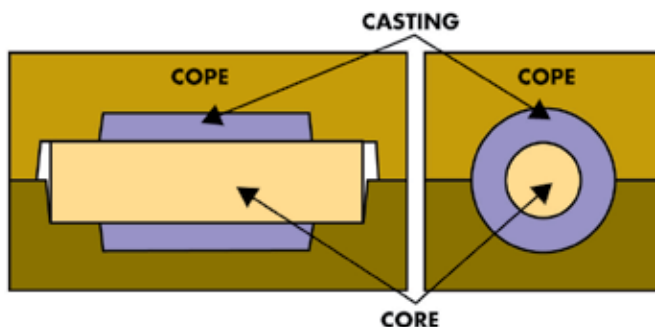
These drawings illustrate the role of the core in the mold to form the internal cavities of the casting.
